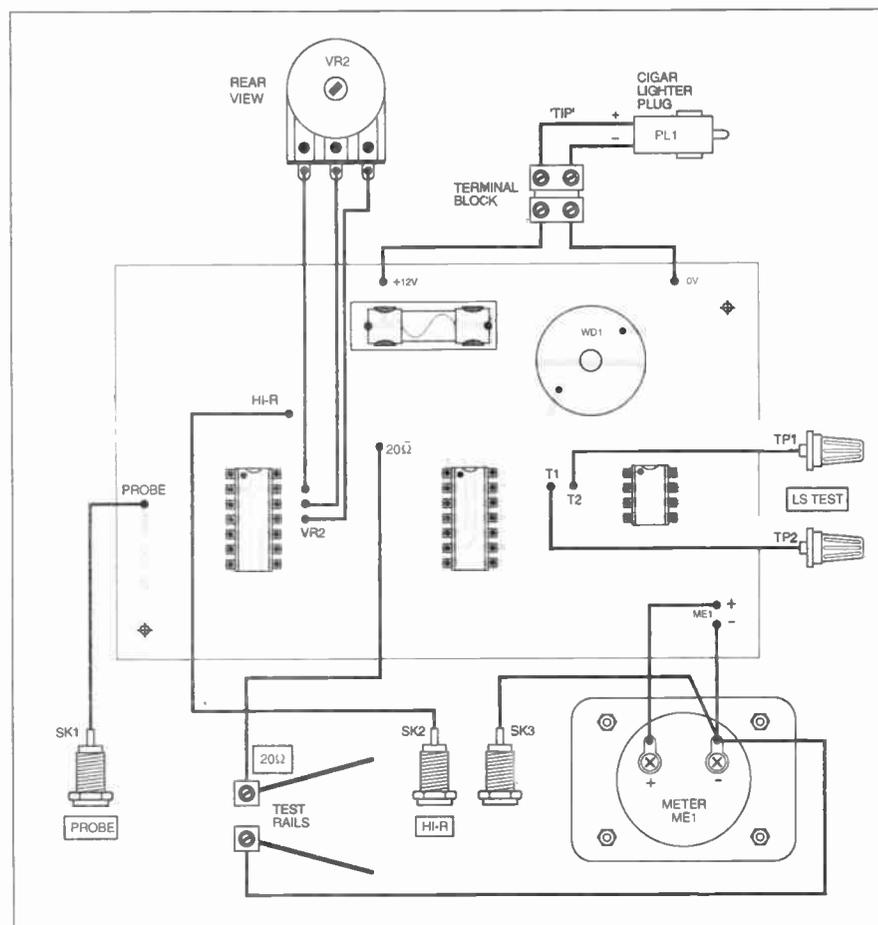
Interwiring from the printed circuit board to off-board components. The general layout within the case can be seen in the photographs.
